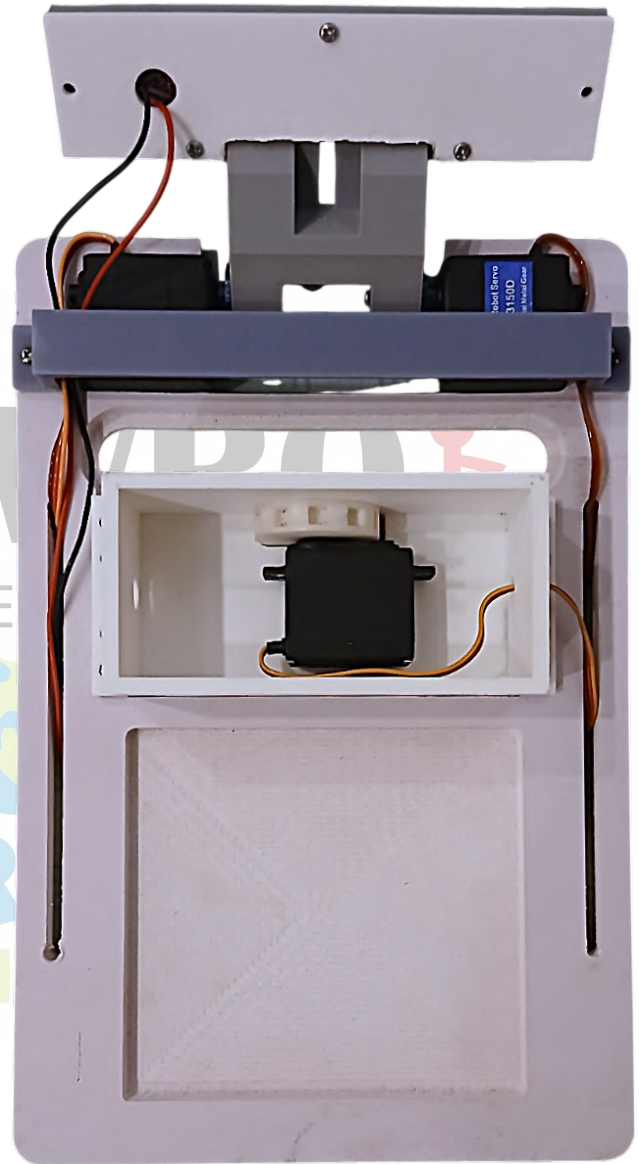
Integration of the seeding compartment onto the PVC baseplate (15cm x 6.5cm). The assembly is secured via screws and houses an internal servo motor that drives a cylindrical seeding head (4cm diameter x 1cm thickness). Grooves within the head capture seeds and transport them to the opening at the base, where they are released upon rotation.
